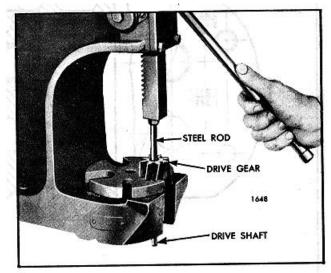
Removing Oil Pump Drive Gear form Shaft.
